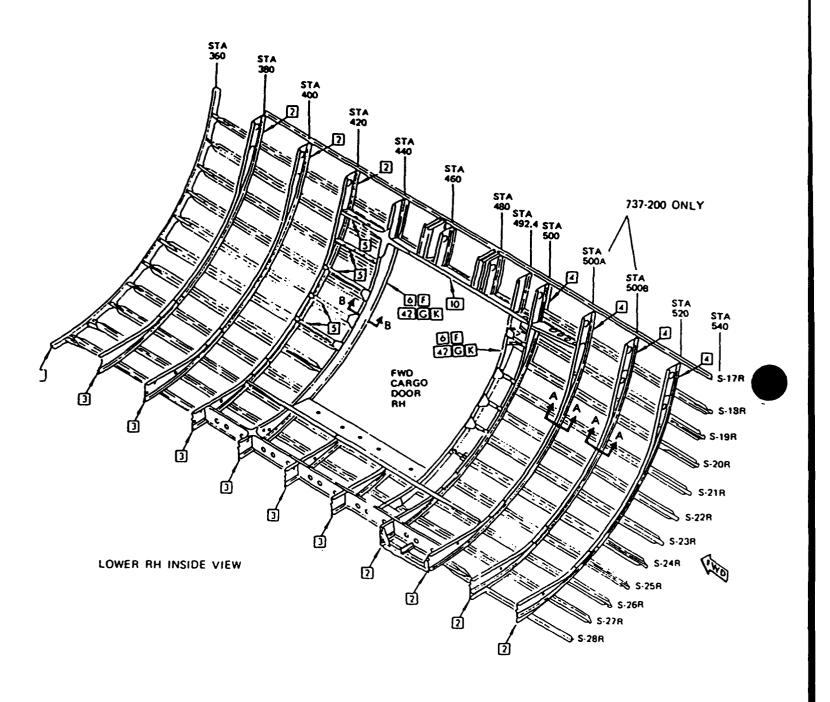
Sample Enlargement of Fuselage Section (section 43) Found in Structural Repair Manual and Used for Structure Identification
